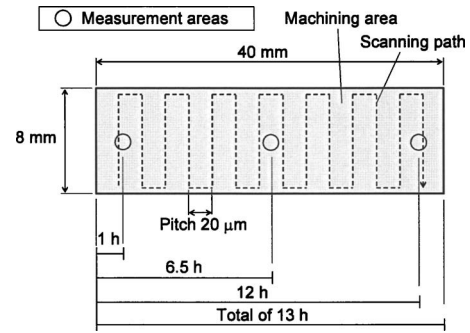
Schematic of processing method and measurement area in extended machining test.
